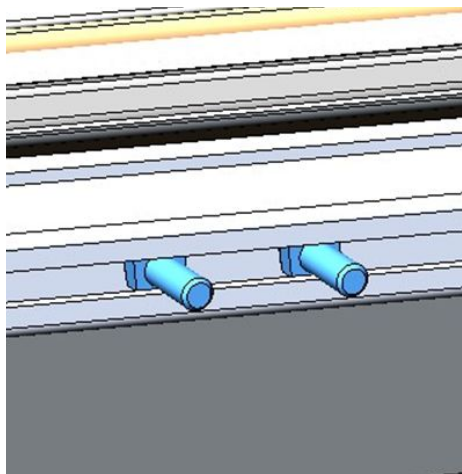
Slide 2x M8x20 hex head bolts into the nut slot frame on side of canopy
